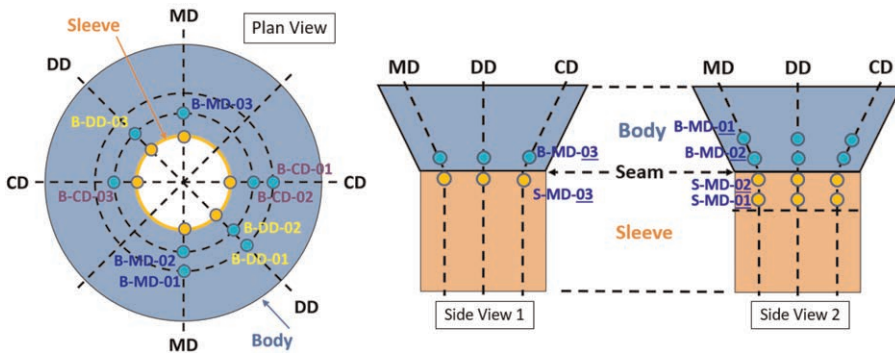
Strain gauge layout on inlet port specimen when loaded onto test apparatus.
